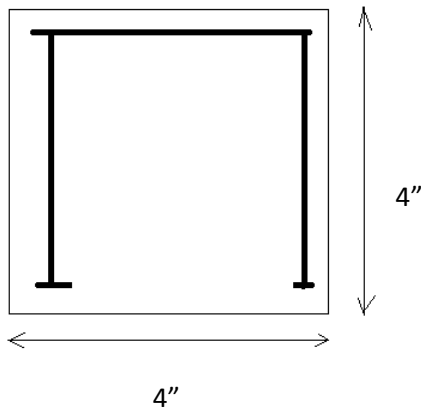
Open cross-section square beam. Maximum dimensions of Cross-section 4"x4"
